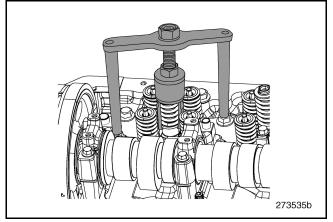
Removing Injector with the Heavy-Duty Unit Injector Puller (Tool No. J 48922)
